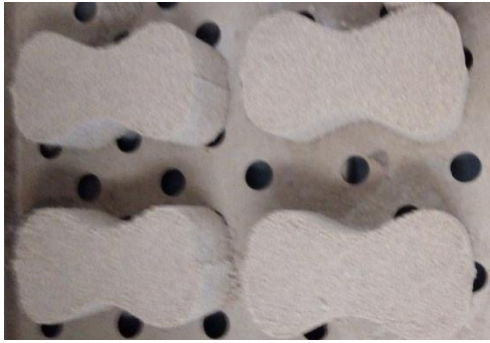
Pictures of produced tensile sand samples ready for tensile strength test
